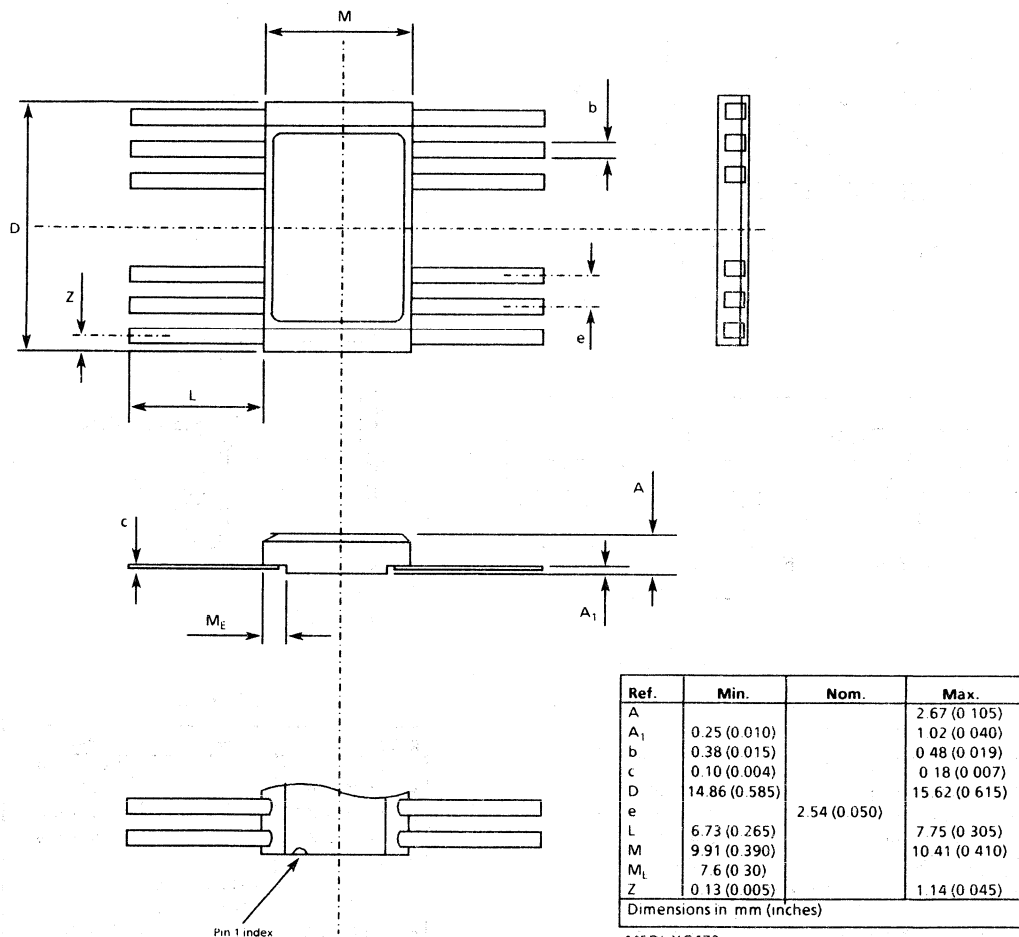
24-lead Ceramic Flatpack (solder seal) - Package style F
